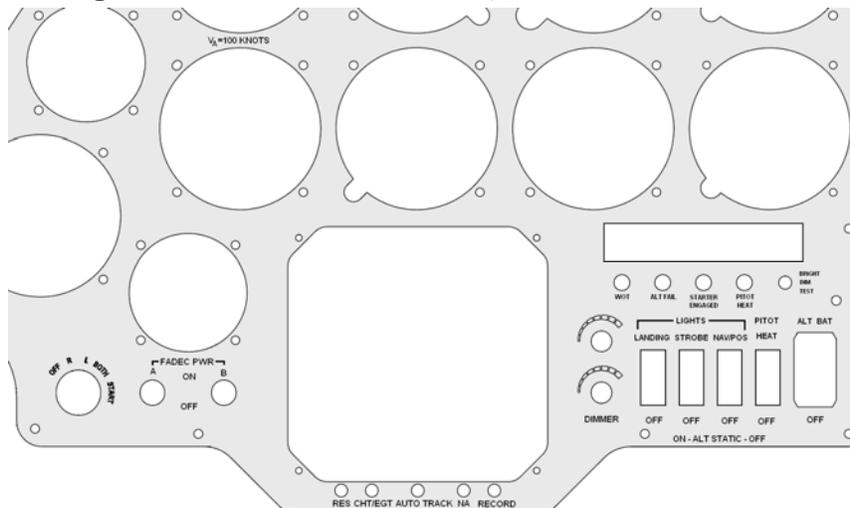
Enlarge View of the Instrument Panel P/N 135A-80-311
